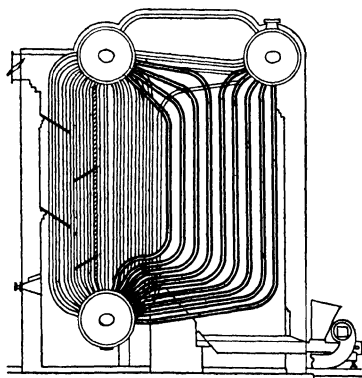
Side wall with tubes rolled into mud drum and steam drums.
